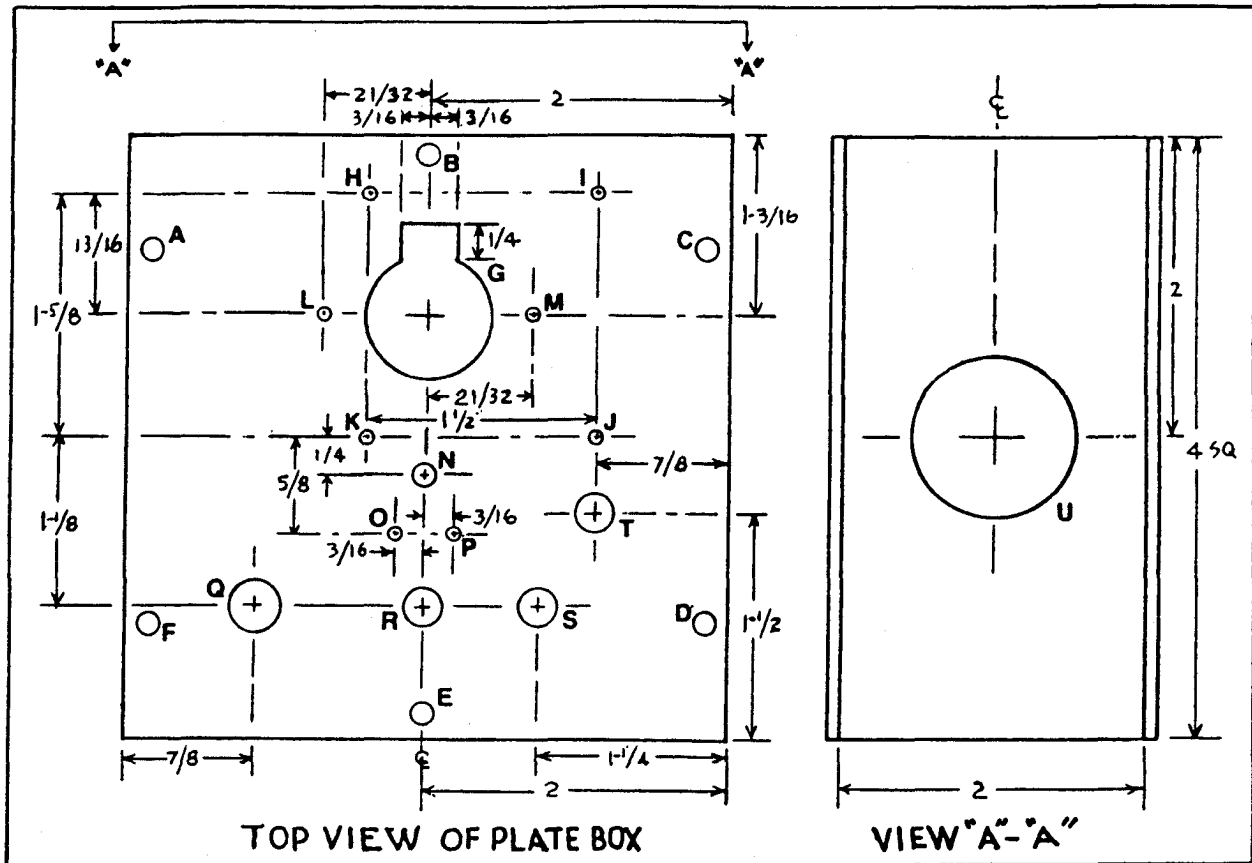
PLATE BOX CONSTRUCTION DETAILS
